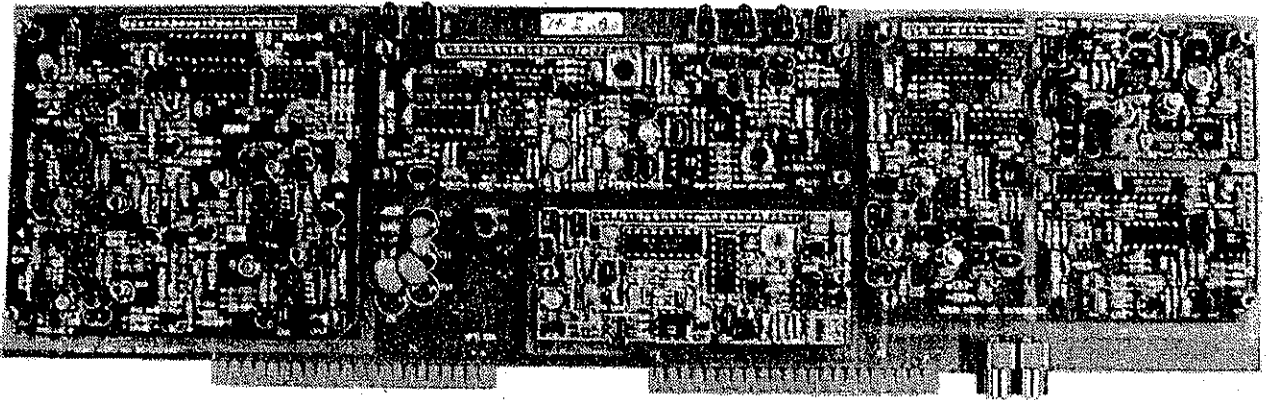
P/N 8076060095 Revision A Synthesizer Module Assembly
